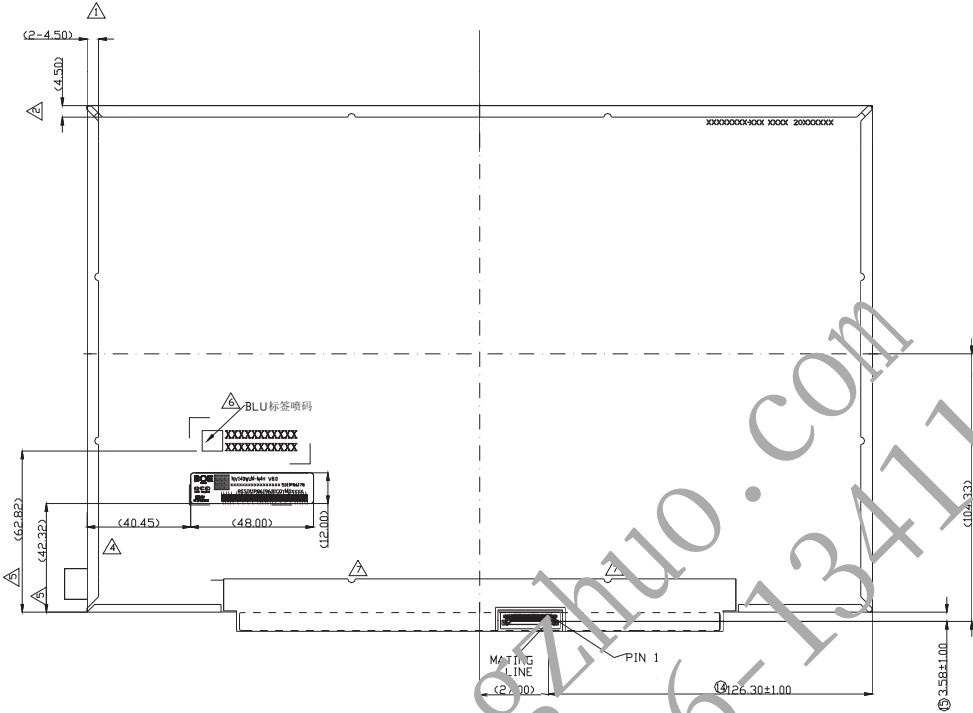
TFT-LCD Module Outline Dimensions (Rear view)
